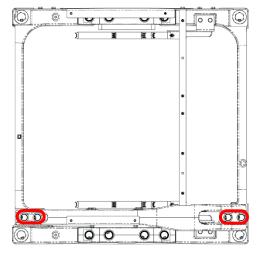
Seakeeper 3 frame with cylinder brace screws identified
